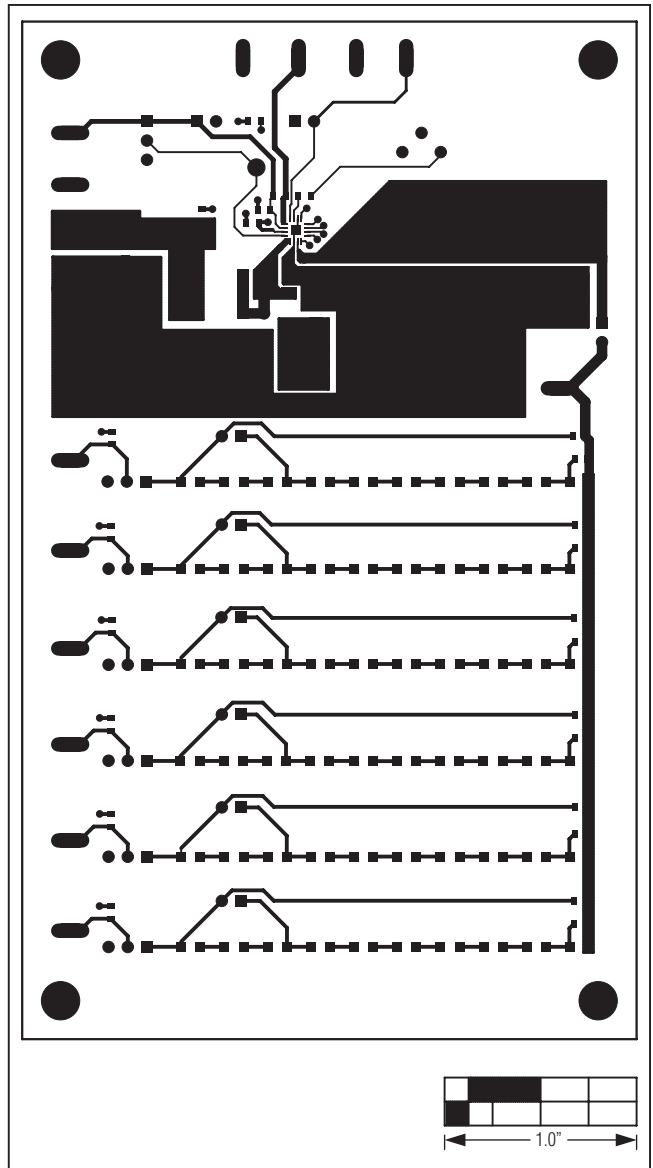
MAX17129 EV Kit PCB Layout—Component Side
